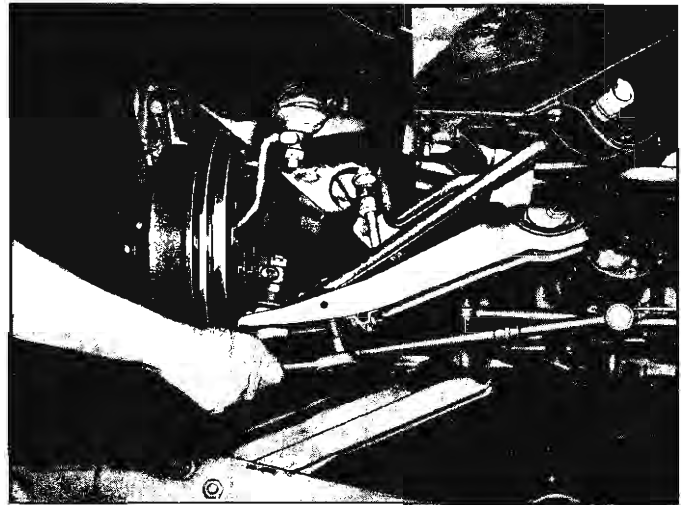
Disconnecting Strut Rod Rear Mounting Studs—Chevy II Shown
